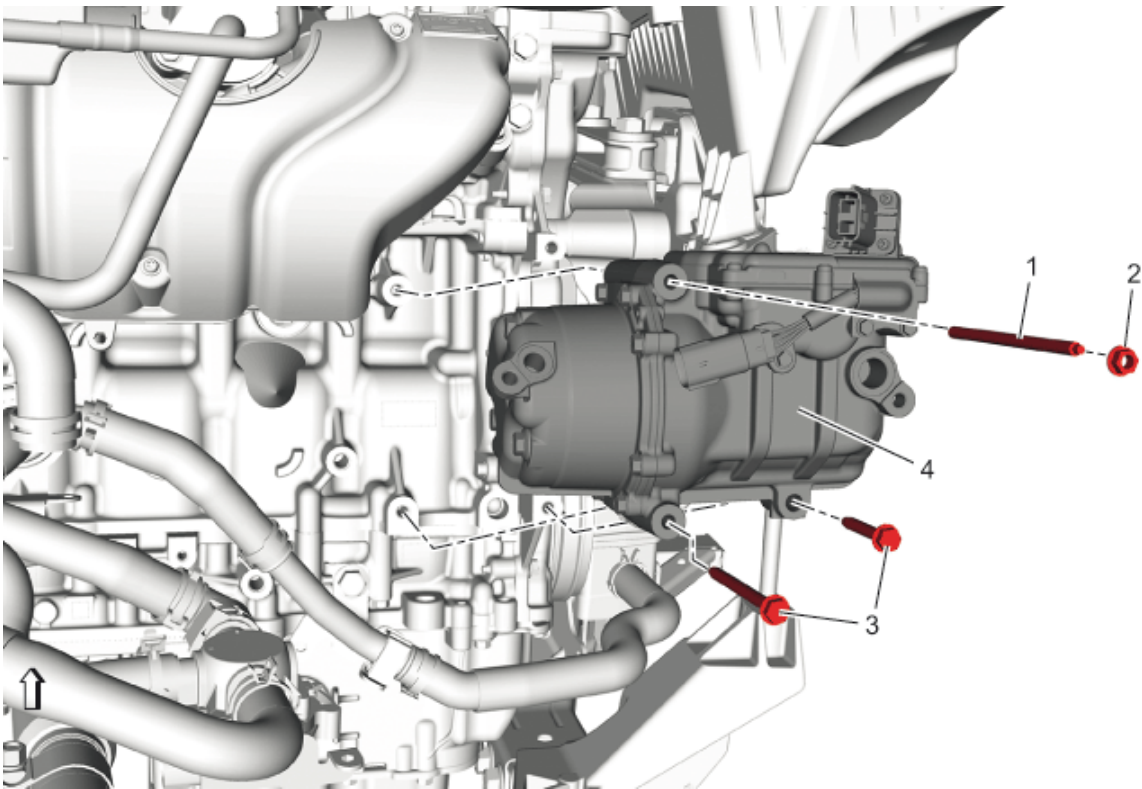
Air Conditioning and Drive Motor Battery Cooling Compressor
